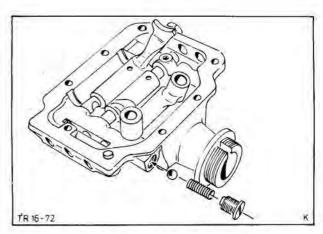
Insert spring and ball of 1st/2nd gear selector rail
